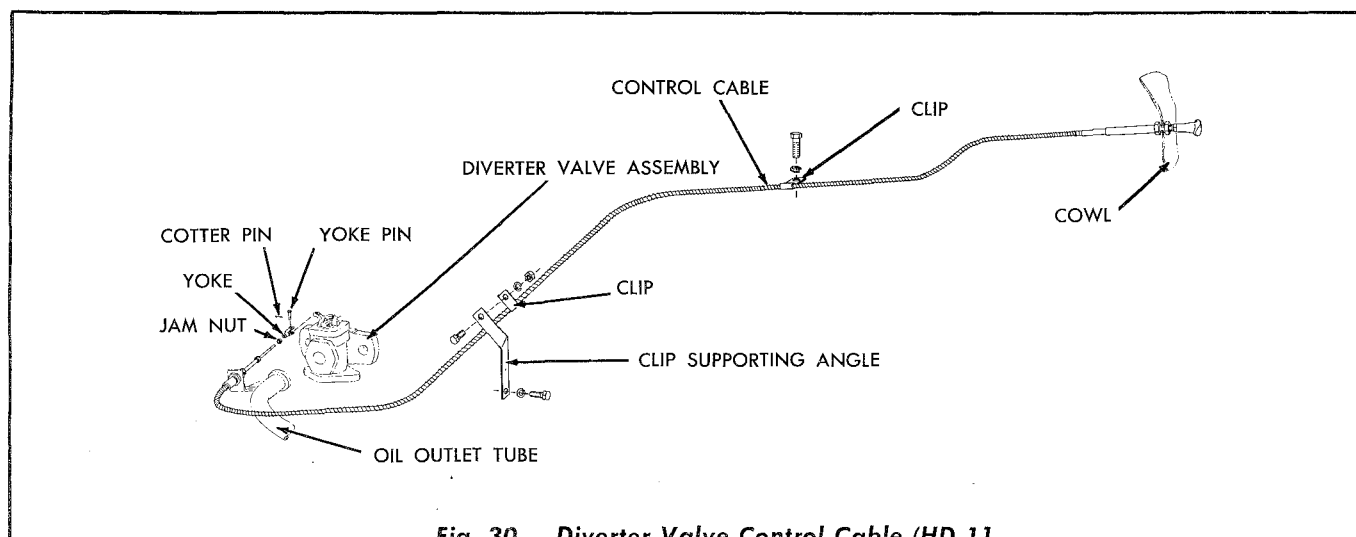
Diverter Valve Control Cable (HD 11 Shown — HD 16 and HD 21 Similar)
